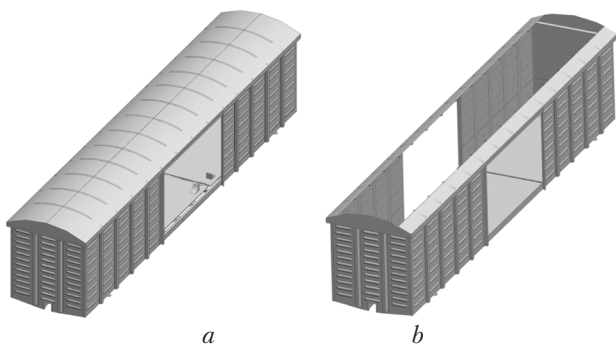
The improved bearing structure of a covered rail wagon with a sliding roof: *a* – the roof in the closed position; *b* – the roof in the open position
